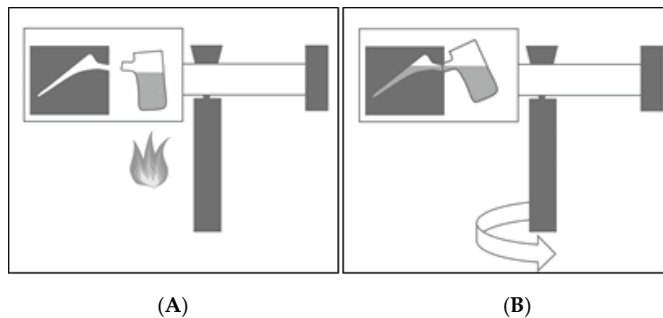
Schematic illustration of a centrifugal precision casting unit: The ingot-casting material is melted (A) and the liquid melt is then pressed into the casting mould by rotating the casting arm around a vertical shaft (B).
